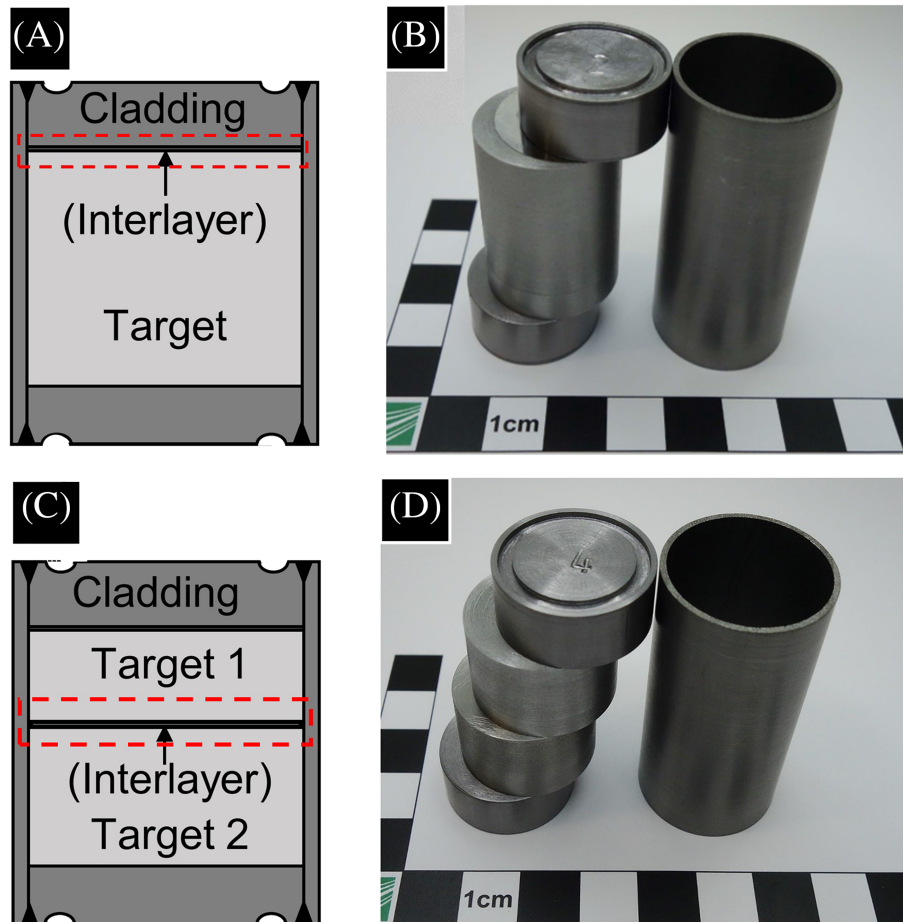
A, Cross-sectional schematic of the prototypes designed to study the target to cladding materials bonding, with the specimen extraction area outlined in red. B, Image of the target to cladding materials prototype components before assembly. C, Cross-sectional schematic of prototypes designed to study the target to target materials bonding, with the specimen extraction area outlined in red. D, Image of the target to target materials prototype components before assembly
